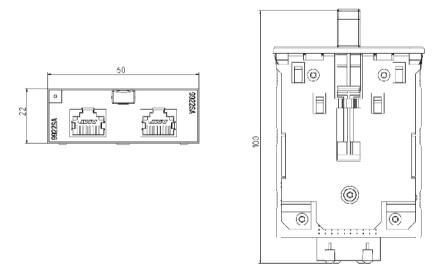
MM900 dimension drawing 2: Electrical RJ-45 ports without securing collar
